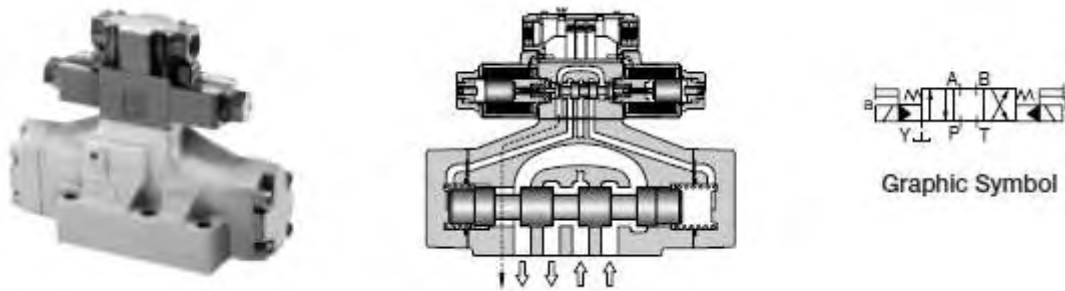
Solenoid Controlled Pilot Operated Directional Valve
